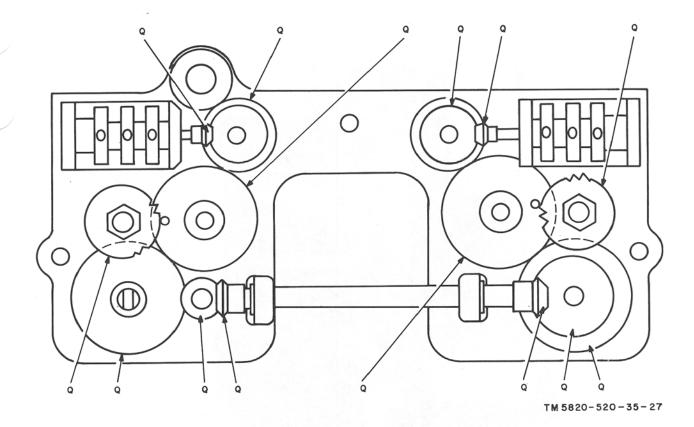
Amplifier, Radio Frequency AM-3349/GRC-106, front panel gear drive assembly, lubrication points.
